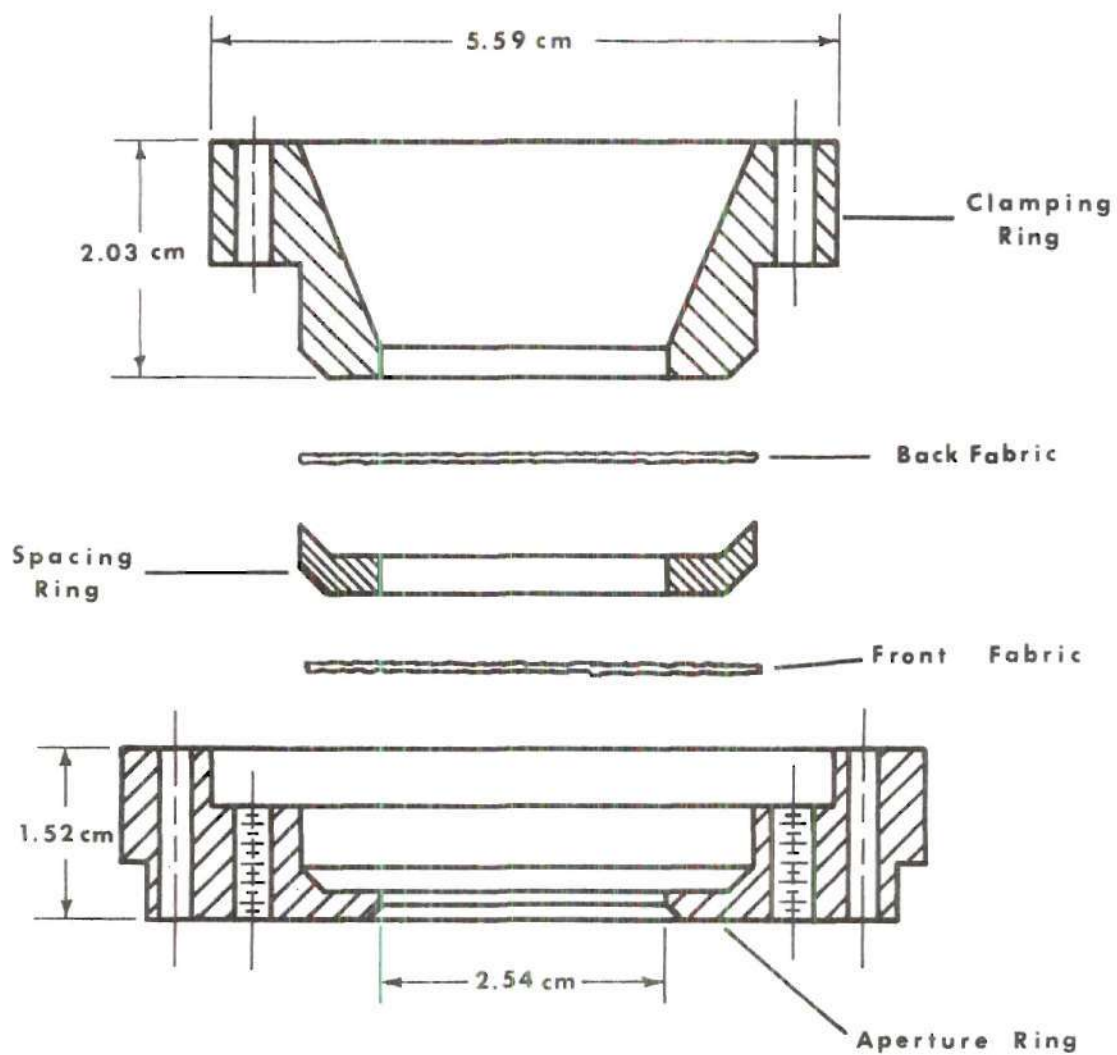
Cross-Sectional View of the Fabric Assembly Holder
